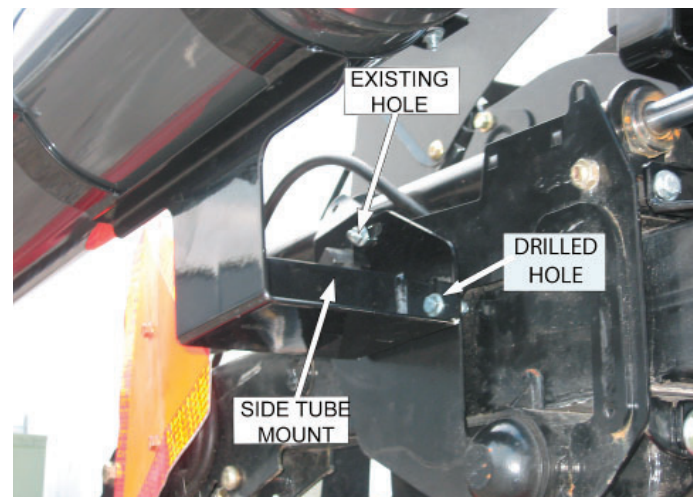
Tube Mount (FD70 & CIH 2162 headers)
